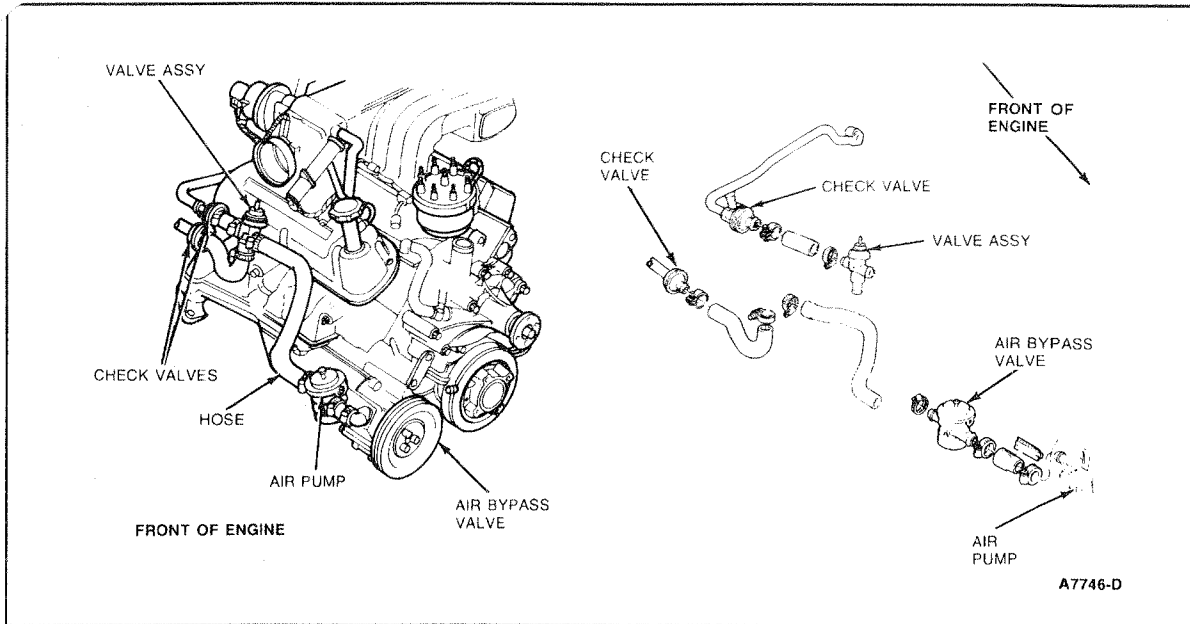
Locations of Thermactor Valves — 5.0L Engine (Passenger Car)
